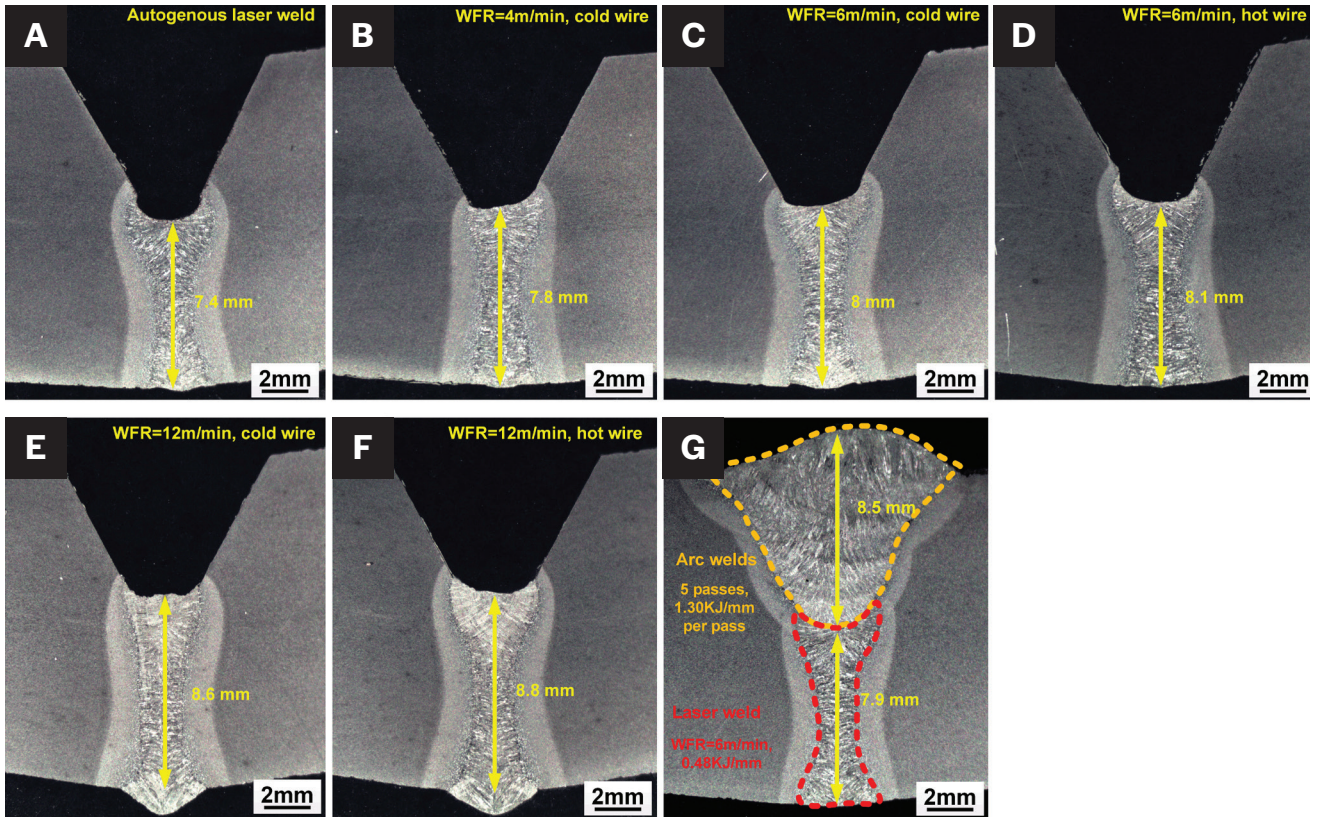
Cross-section morphologies: A – Autogenous laser weld; B – cold-wire laser weld, WFR = 4 m/min; C – cold-wire laser weld, WFR = 6 m/min; D – hot-wire laser weld, WFR = 6 m/min; E – cold-wire laser weld, WFR = 12 m/min; F – hot-wire laser weld, WFR = 12 m/min; G – final joint with root laser weld and 5 passes of filler GMAW weld.
